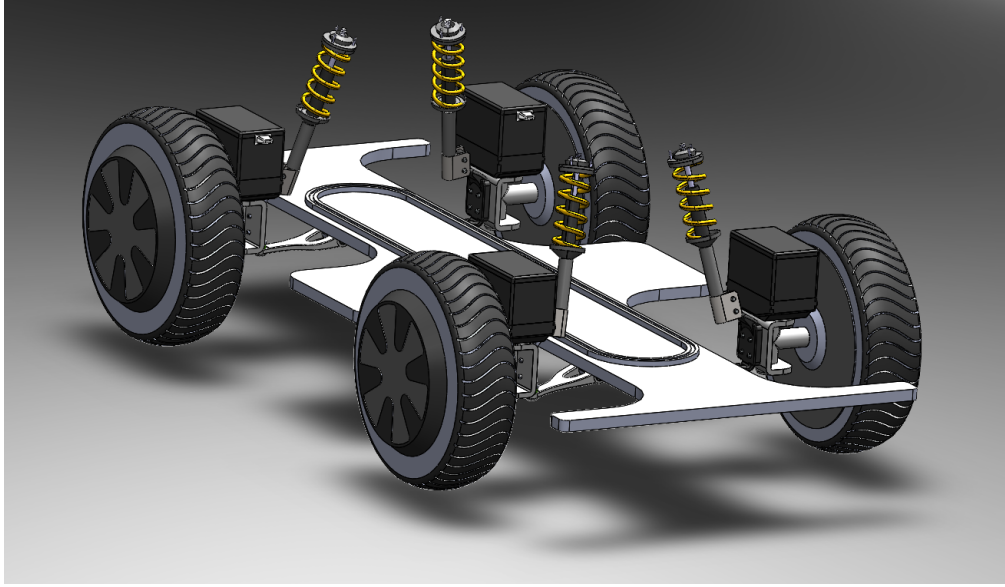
Three-dimensional design of the robot base with suspension and steering system.
